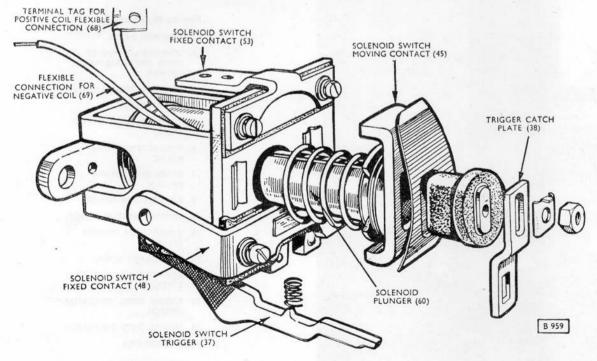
Exploded view of starter motor solenoid switch (C.A.V.).
